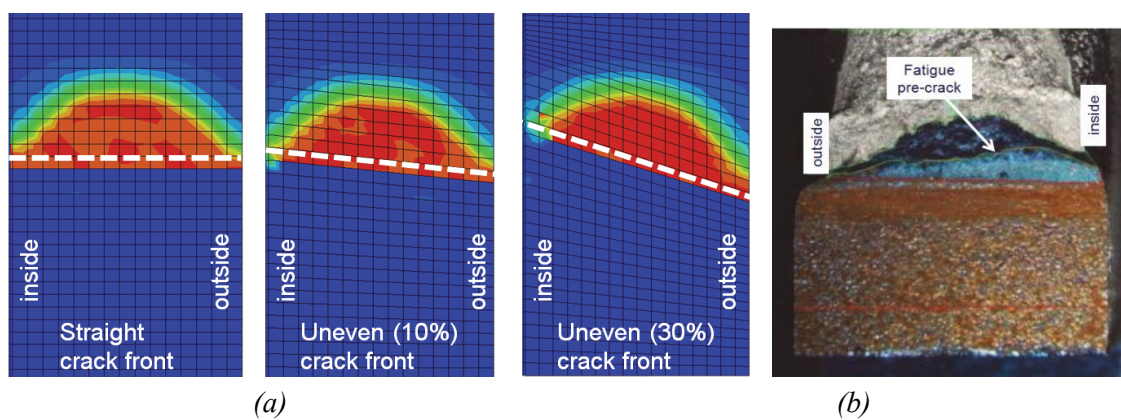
Crack growth for the straight and uneven crack front (a), and a photo of fatigue pre-cracked ring fracture surface (b)
